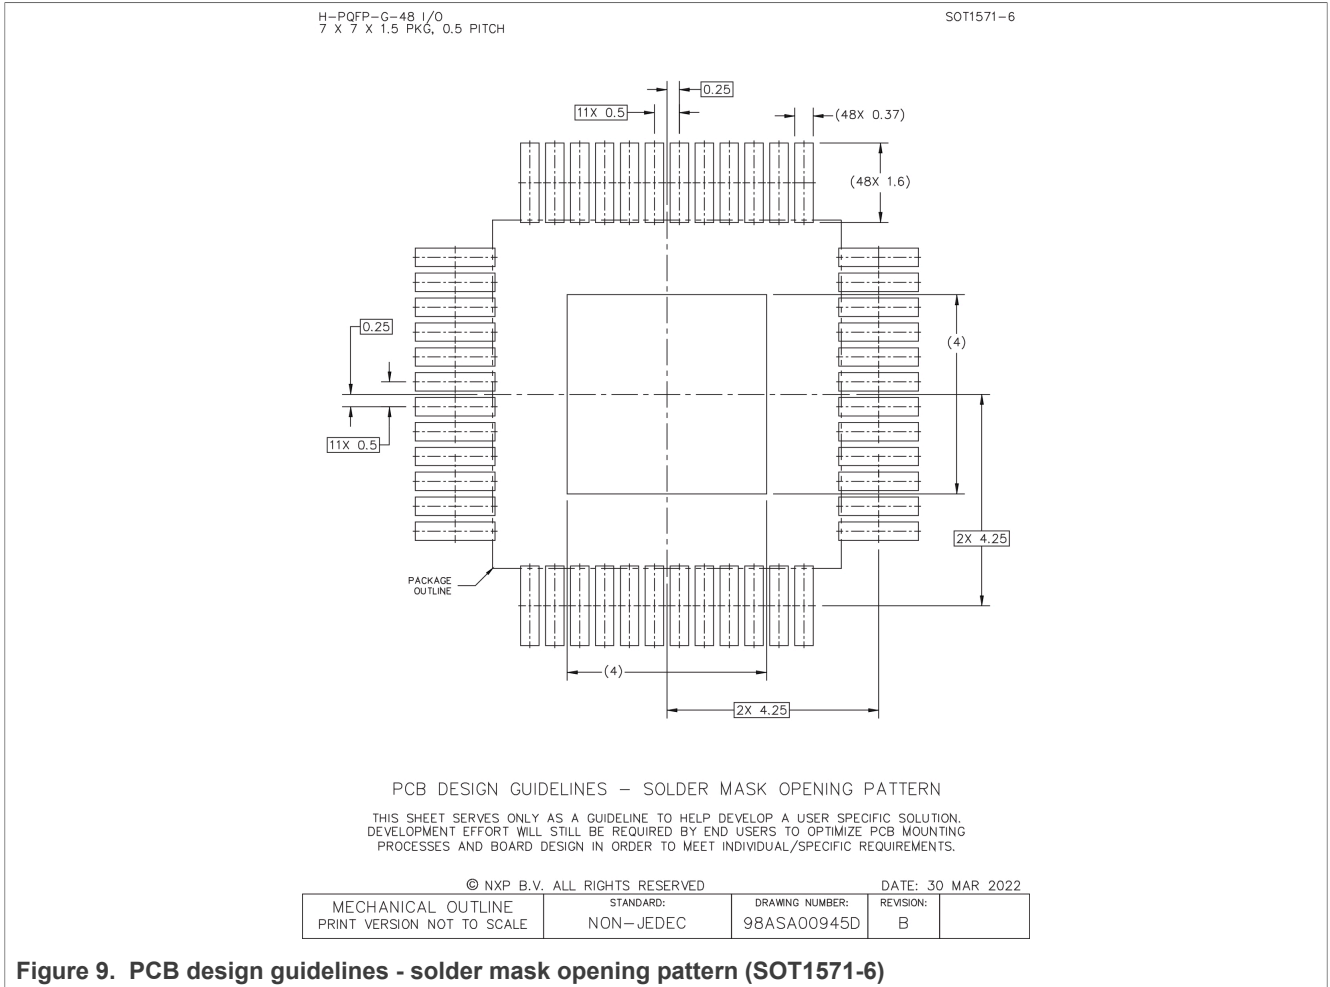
PCB design guidelines - solder mask opening pattern (SOT1571-6)
